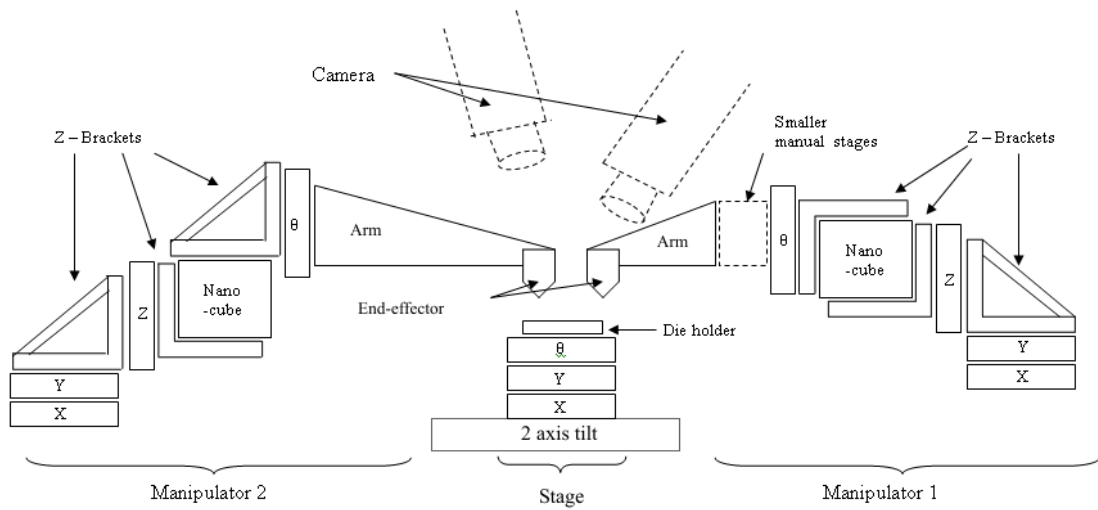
A schematic drawing of the 3-D micro assembly system.
